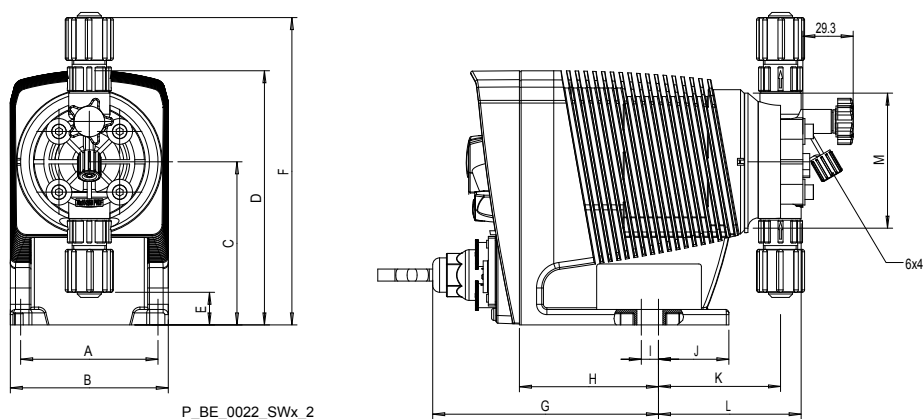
Dimension drawing Beta b BT4b/BT5b, material version PV - dimensions in mm
